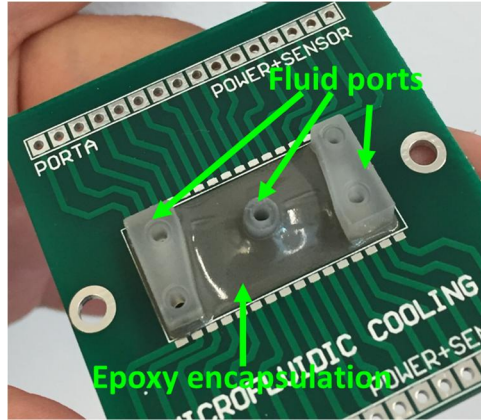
Fluid ports through the packaging substrate attached to the die and epoxy encapsulated
